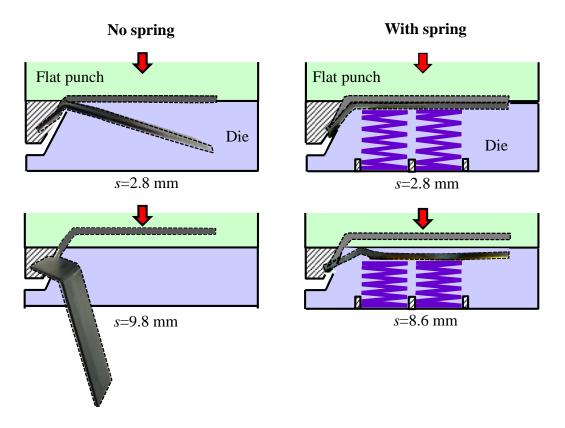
Deformation behaviour for trimming the JSC1180YN sheets without and with the coil springs.
